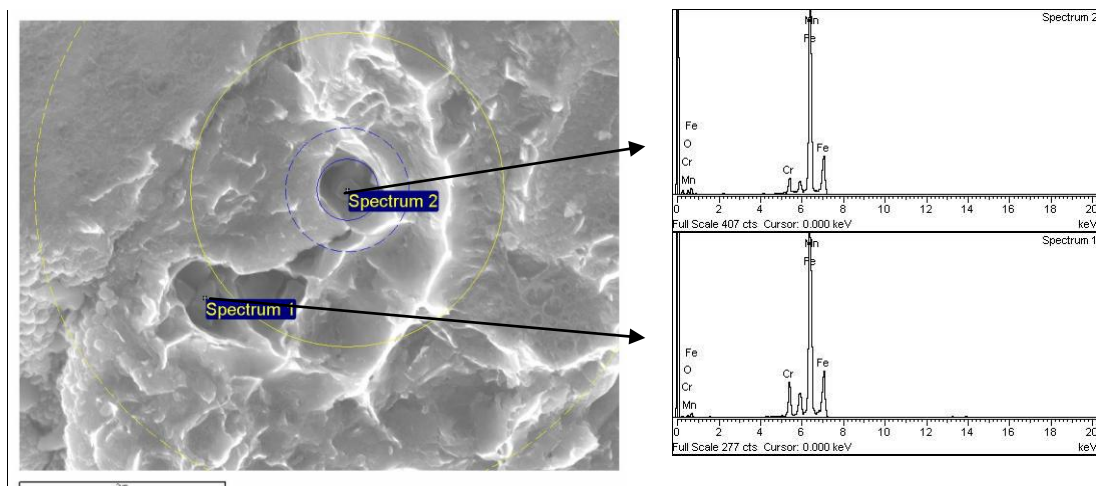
FRACTURE SURFACE OF A700-3 AT 9000X.
